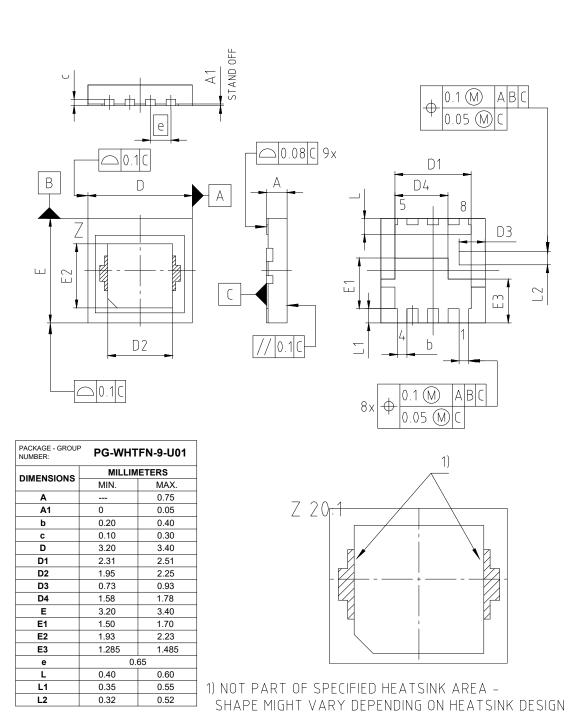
Outline PG-WHTFN-9, dimensions in mm
